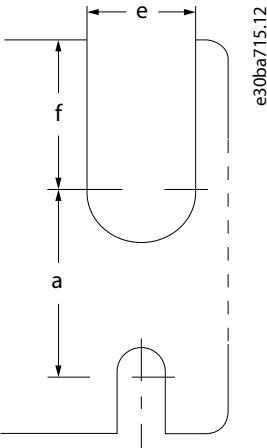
Top and Bottom Mounting Holes, Enclosure Sizes B4, C3, and C4
